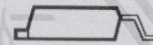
5-Lead DPAK/TO-263 (S) SFM Package – Side View
